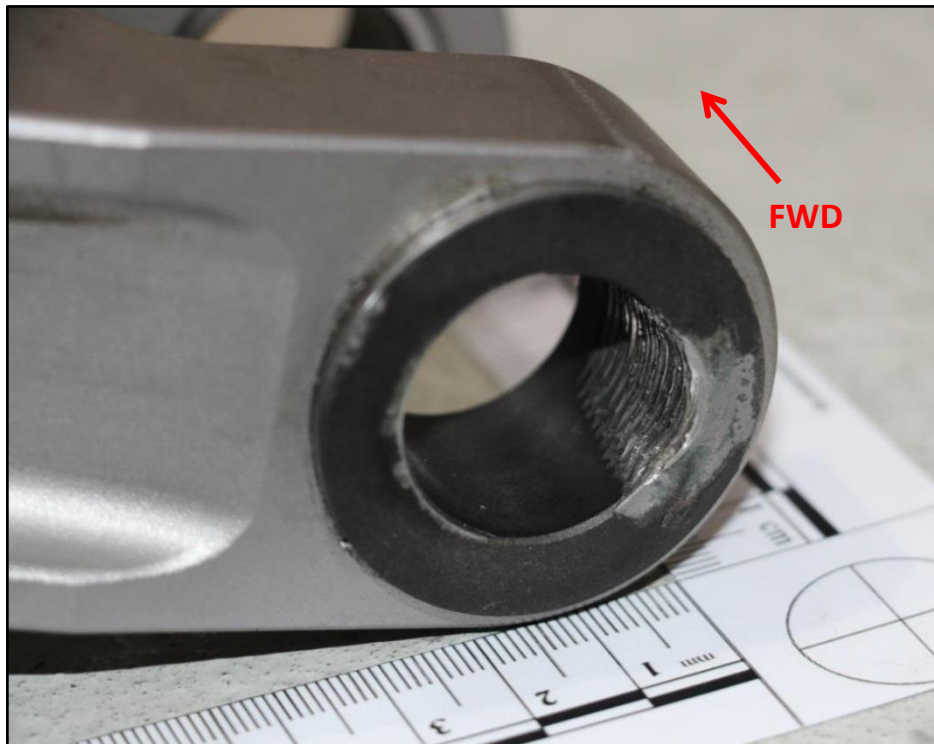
Damage to forward support position of walking beam hanger clevis
